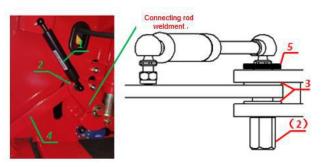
Shaft Fixing Module 1. Shaft fixing module 2. Shaft bush 3. Pipe 4. Spring 5. Shaft bush 6. Shaft bush
